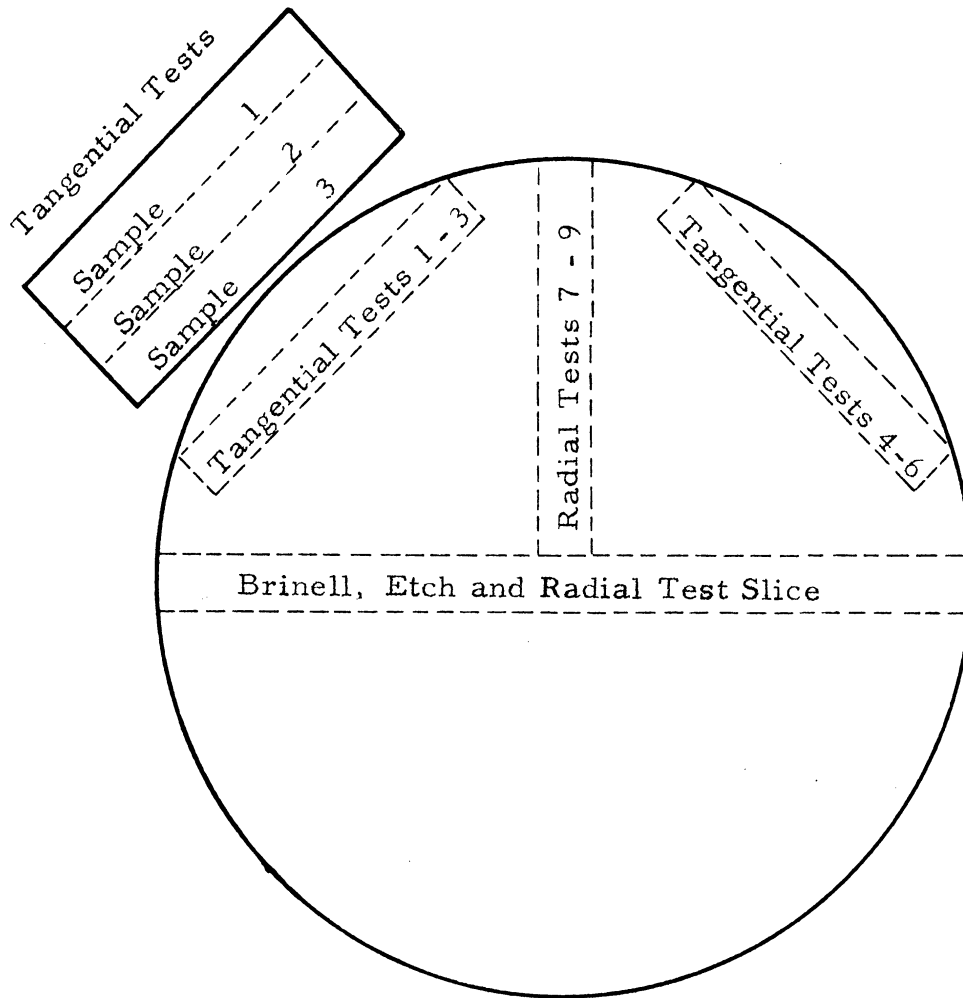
Sketch to show Location of Test Specimens in 15-inch Diameter by 4-inch thick Forgings from Heat 02392.
